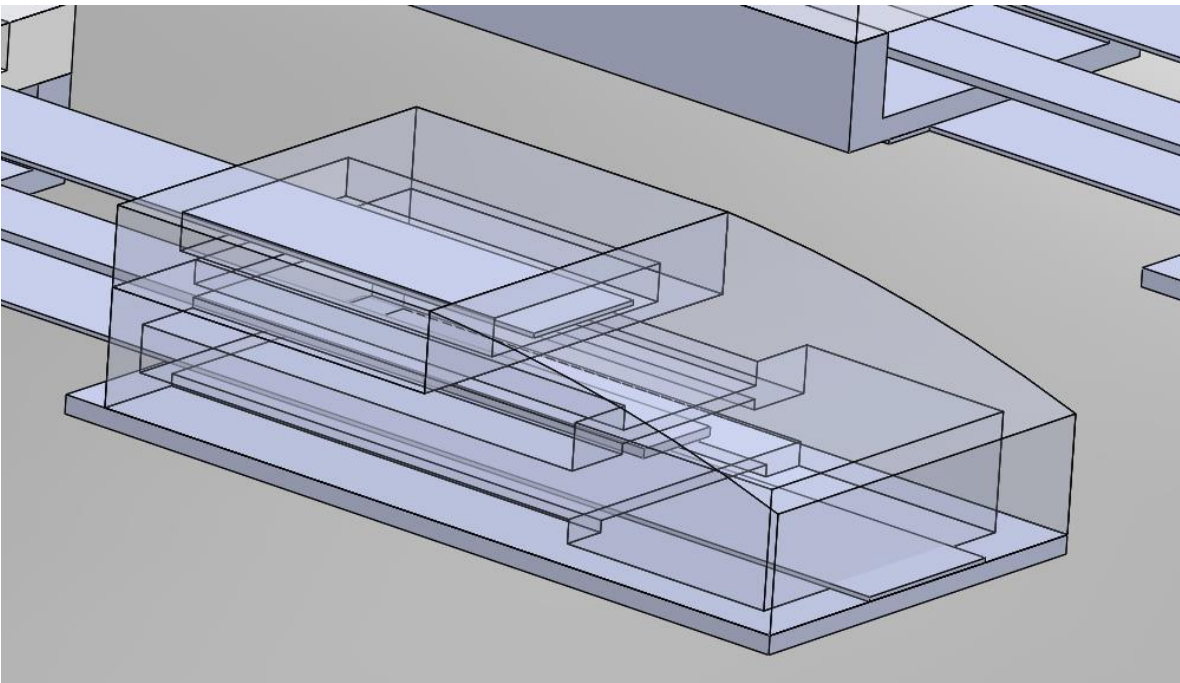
Final CAD Model: Assembly of distal phalanx/ finger guide under partial transparency.
